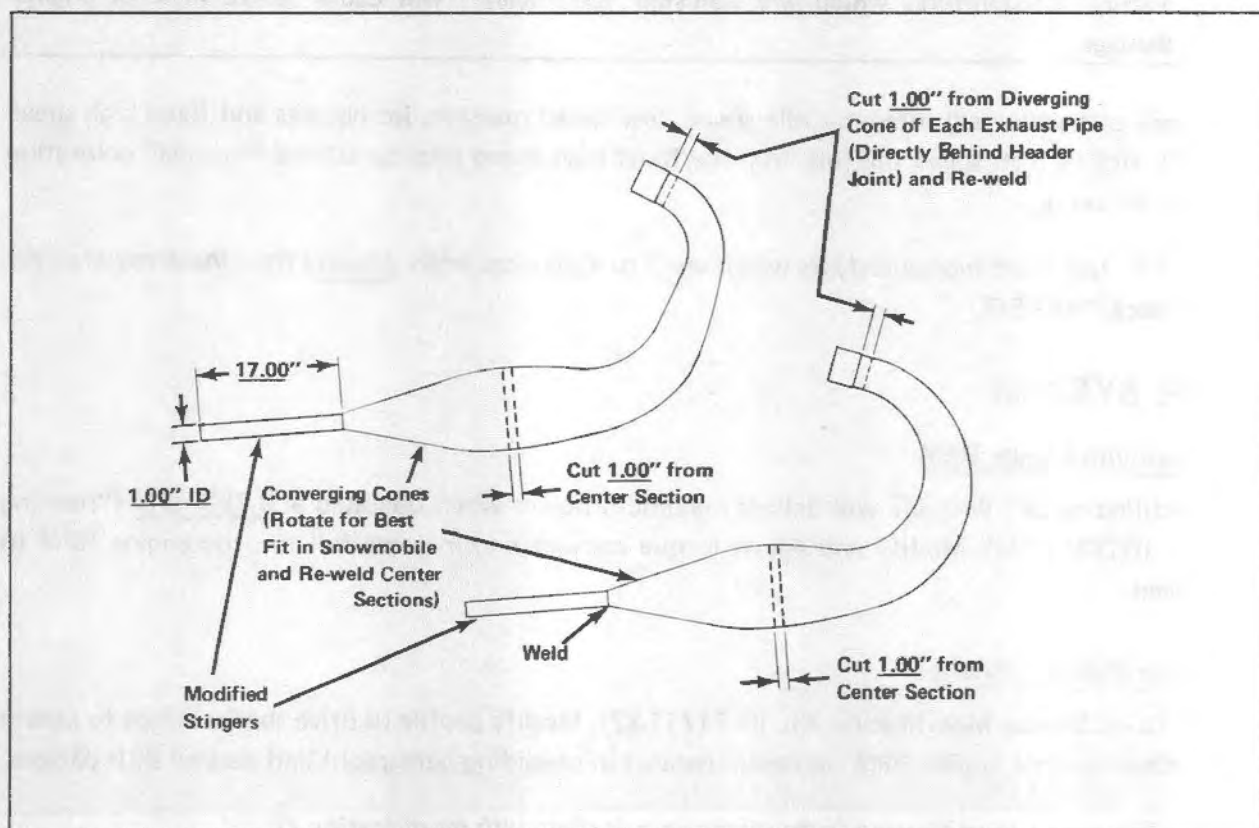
440 S/T "Modified-Stock" Exhaust Pipes
